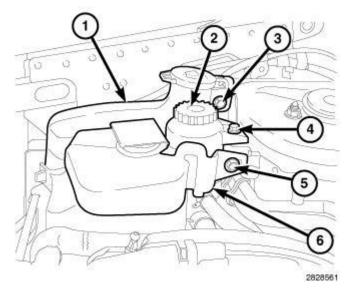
Windshield Washer Reservoir, Power Steering Reservoir, Coolant Reservoir & Bolts Courtesy of CHRYSLER GROUP, LLC
